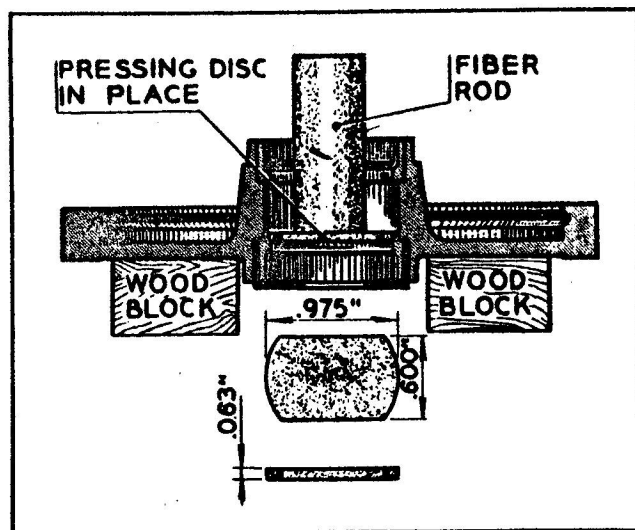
Removing Ball Bearing Outside Race from Distributor Gear Hub
